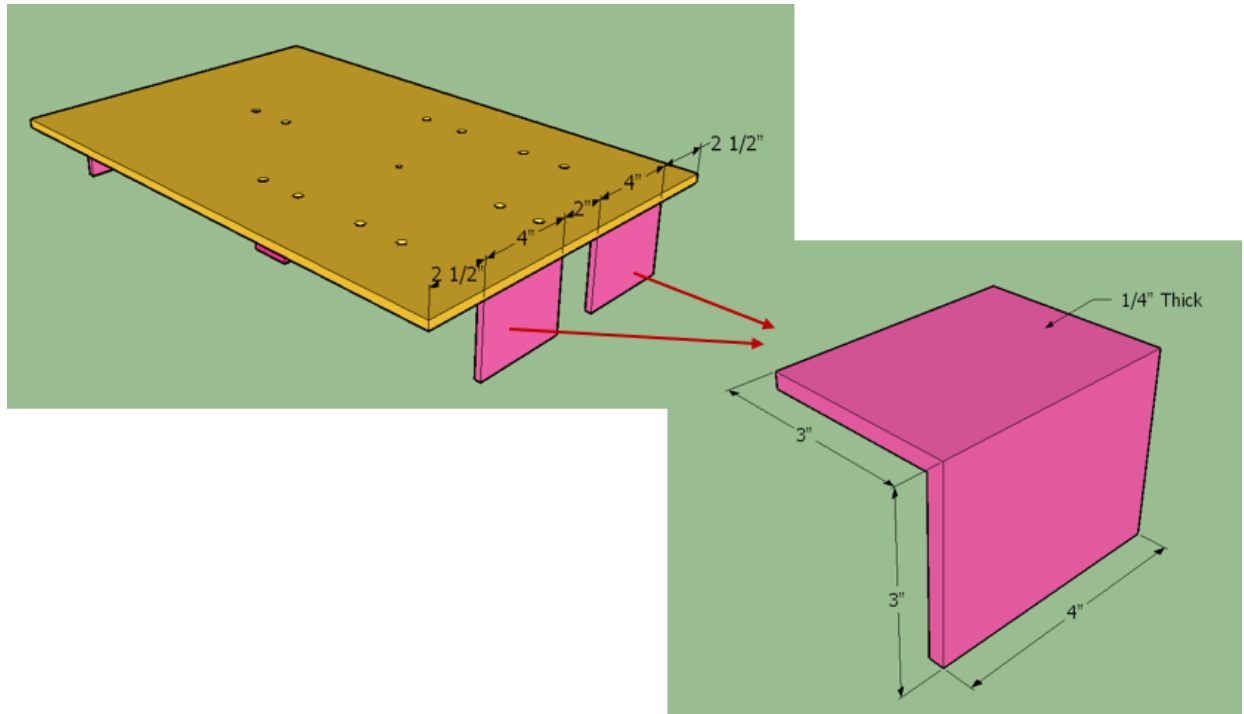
Right Flange of the Base Plate- Sample Holder of Rectangular Specimens.
